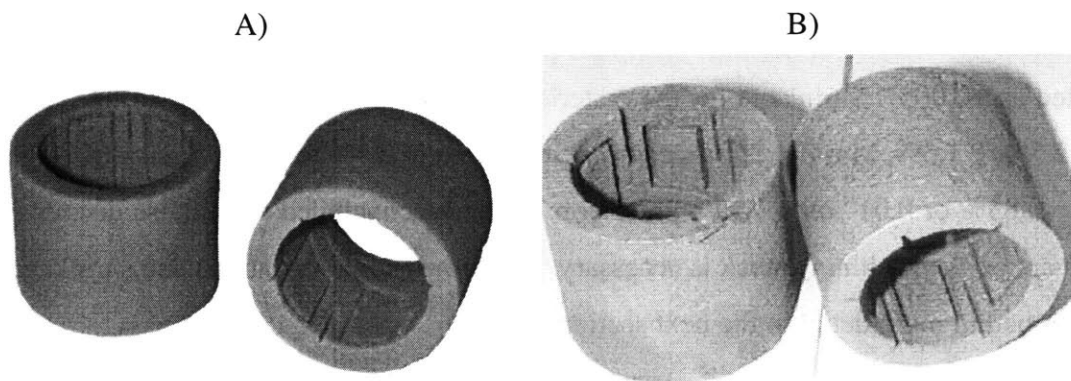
A) 3D-Printed wax pattern, B) Investment cast part
